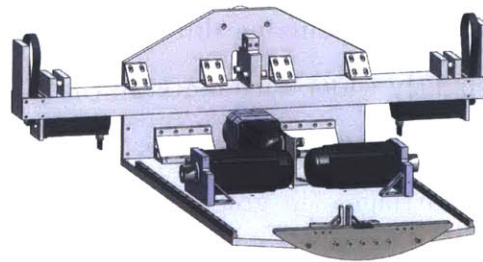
(a) shows the linear wedge assemblies installed on the base assembly. The linear wedge is fastened to a helical rack gear. FEA was conducted on multiple designs of the wedge. Thinner wedges with the cam path cut through the wedge was attractive because it lowered the weight, however, the FEA showed stresses above yield for loads occurring during quick drop profiles. For this reason, the wedge was made slightly wider with material that closes the back of the cam path. Figure 3-3(b) shows the sagittal plane motors mating with the rack. A clear view of the linear bearing carriages (in green) can be seen in figure 3-3(c). Notice here that we also introduce a torsion restraint linkage that mounts behind the motor. The purpose of this linkage is to resist frontal plane torques that are created when subjects load the inner portion of the treadmill. It attaches to the center support beam of the treadmill assembly (figure 3-4(c)). Without these linkages, there is noticeable frontal plane rotational deflection on the tracks with a 150 pound person loading the center of the track. When installed, the deflection is unnoticeable. Detailed design and calculations for the linear cams and linkages can be found in sections 3.2.3 and 3.3.2.
